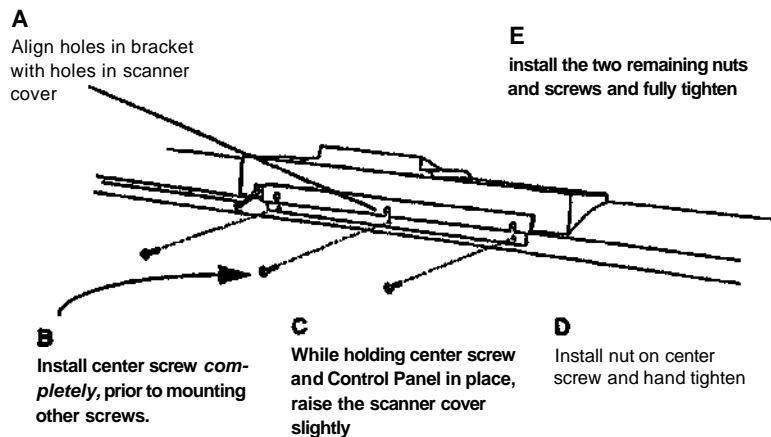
Rear view of 8830 DDS Control Panel showing fastener alignment
